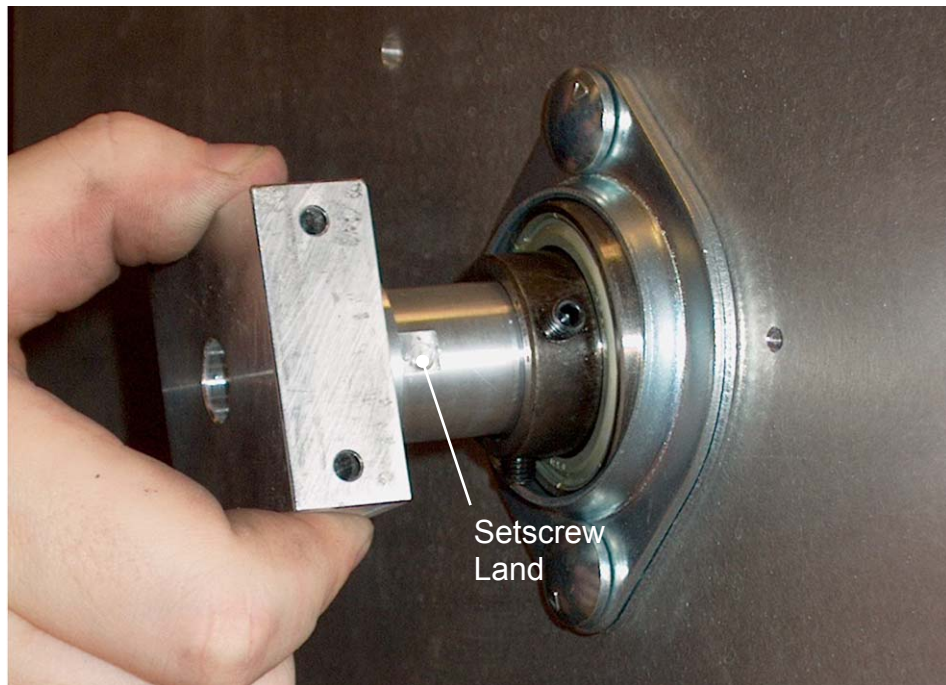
Insert Pitch Shaft and Align Setscrews with Setscrew Lands
